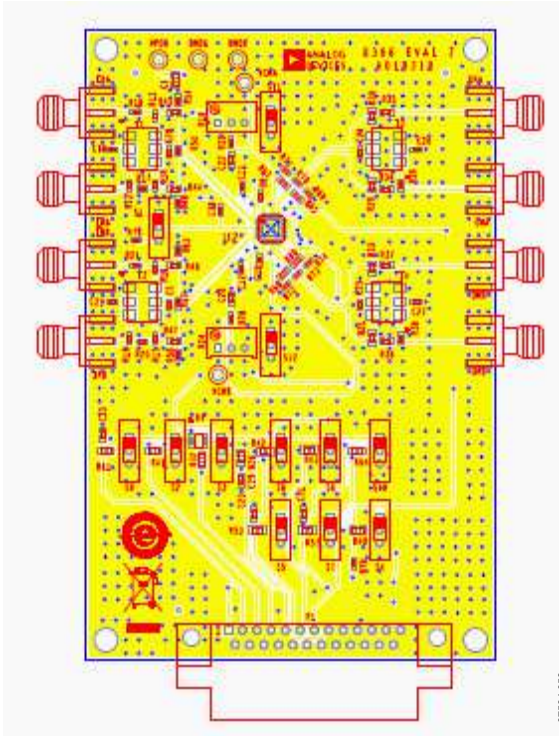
AD8366 Evaluation Board Printed Circuit Board (PCB), Top Side
